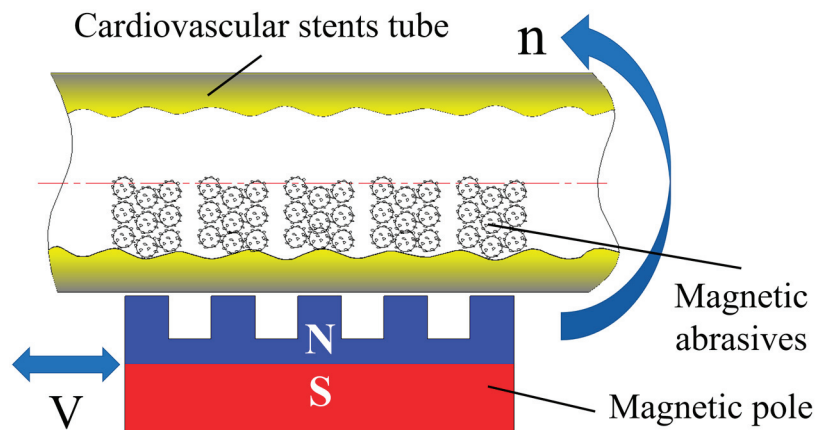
Ultra-slender cardiovascular stent tube inner wall magnetic particle finishing machine.
